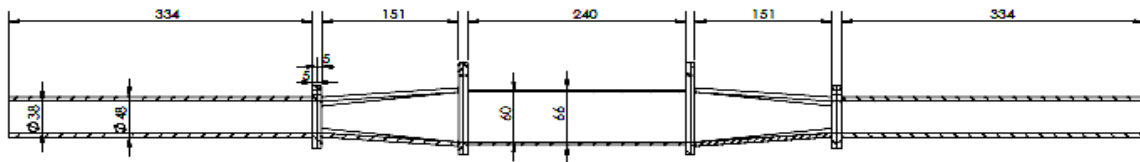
Schematic layout of exhaust heat exchanger (test section 60 × 60 × 240 mm) (E-type).
